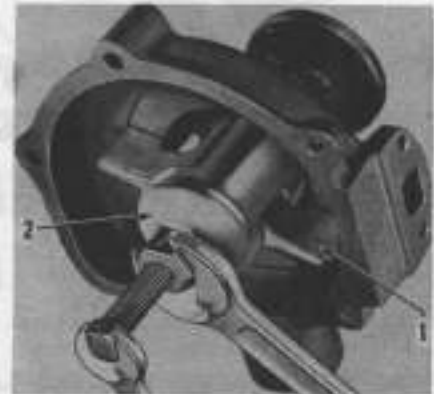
Pulling impeller on ball bearing type pump used on Chrysler engines.
